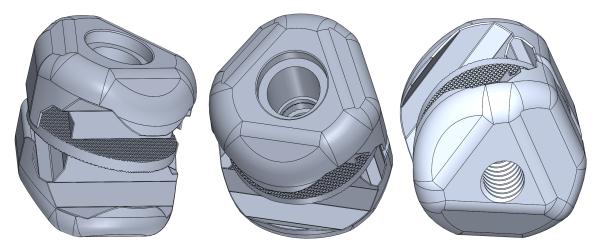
Fourth clamp concept; a) Isometric view, b) Top view, c) Bottom view
